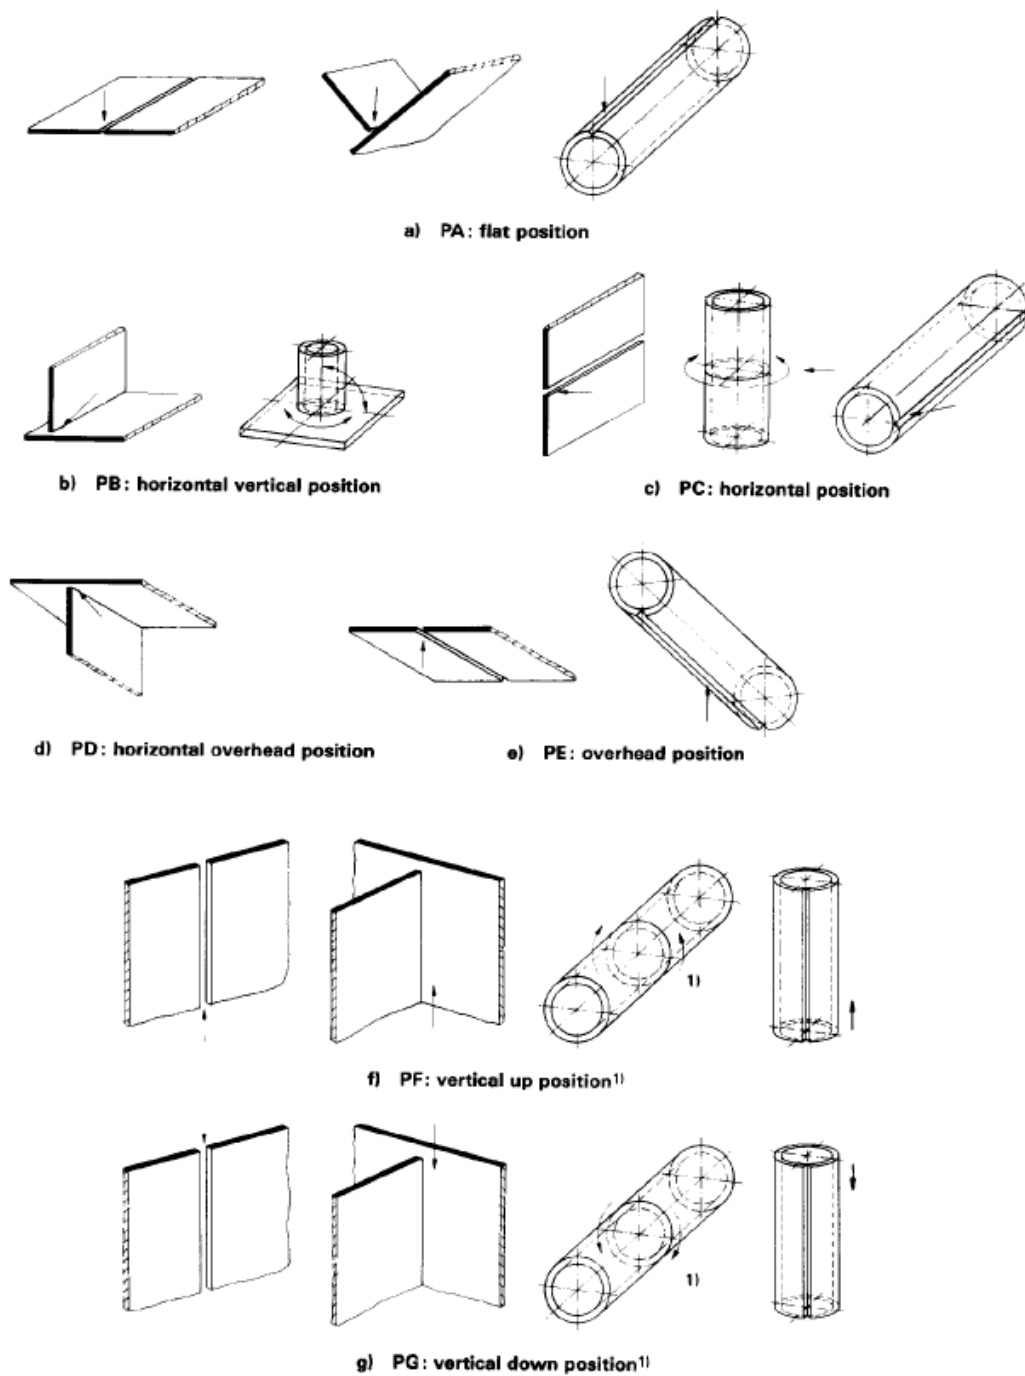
Examples of main positions for butt and fillet welds
